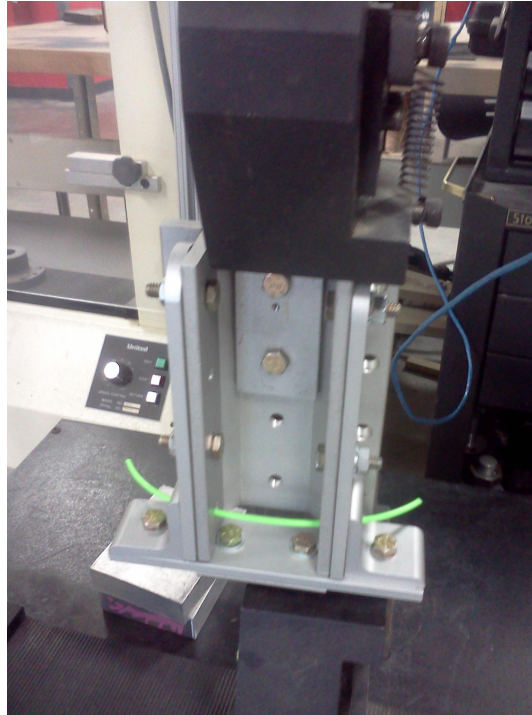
Custom Fixture in UTM, holding ABS for Shear Testing.
